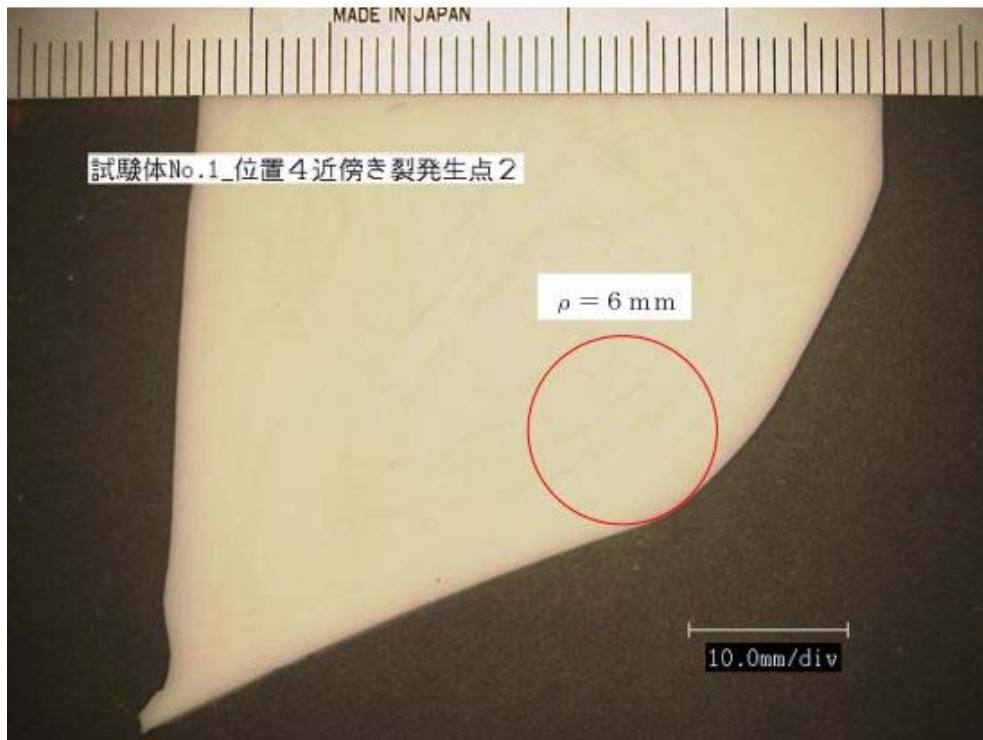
Weld profiles of the saddle part in specimen2 (T2), $\rho=6\text{mm}$.
